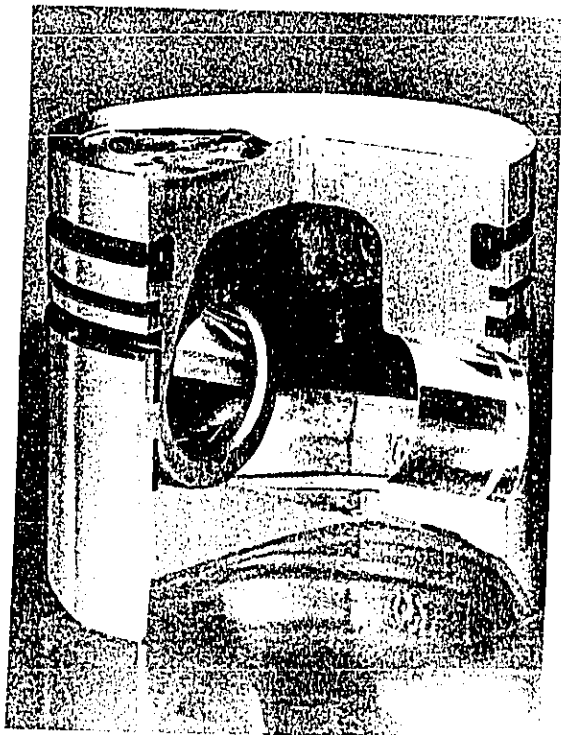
Expansion controlled aluminium piston for automotive IDI-diesel engine of 76.5 mm cyl. dia.
